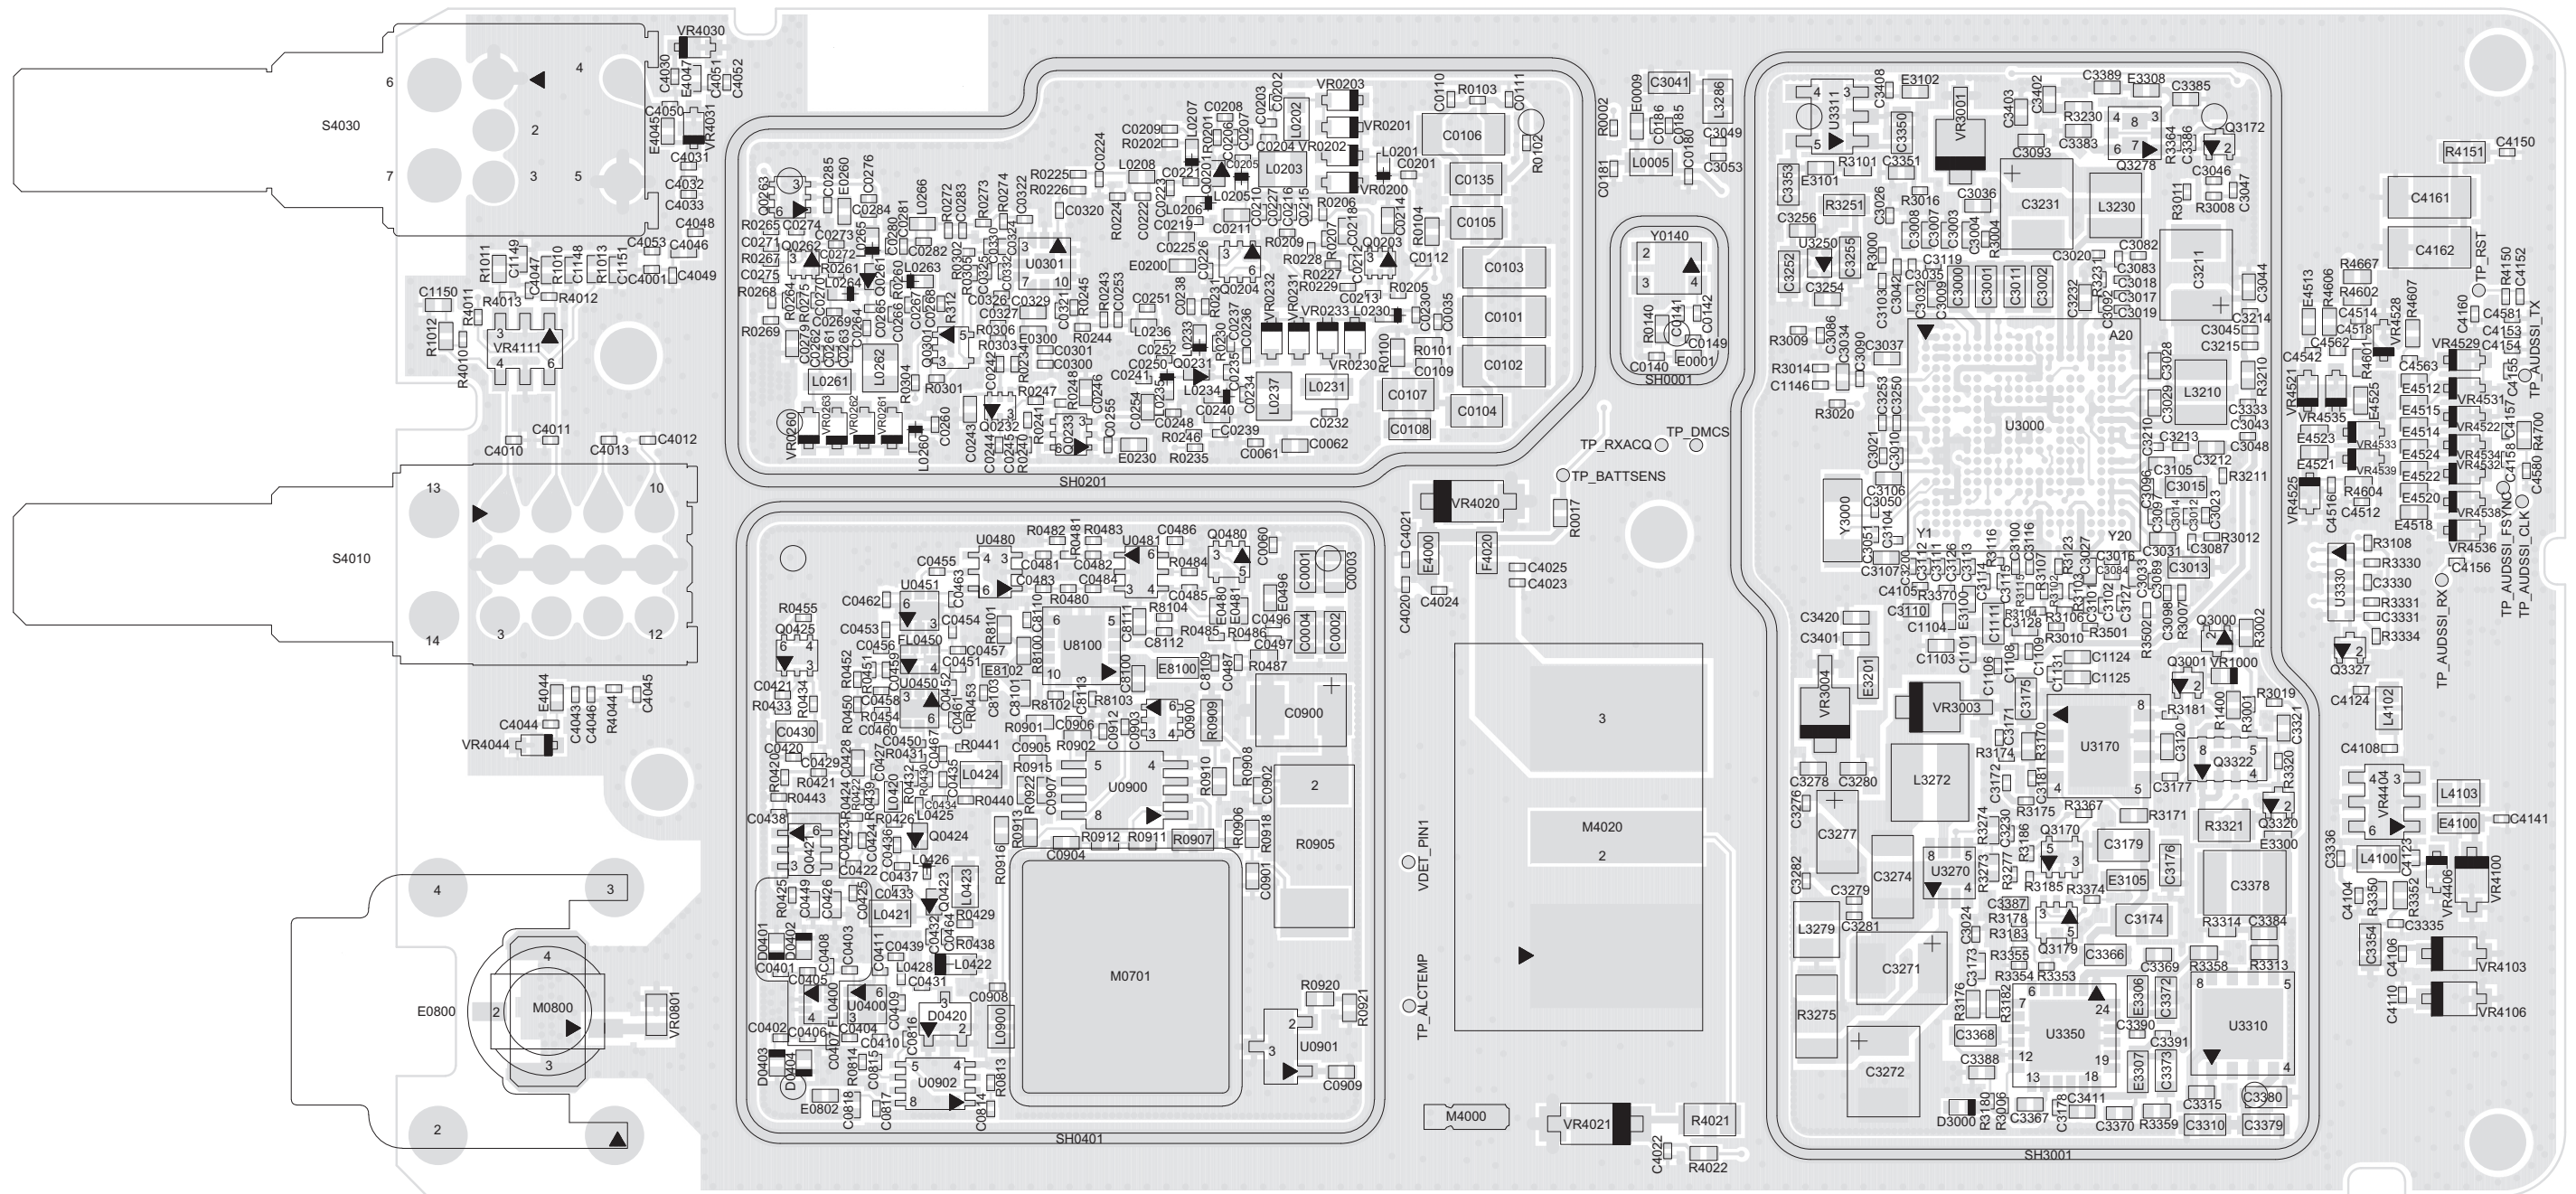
Main Board 800/900 MHz Bottom Side PCB No. PC000970A01\_AA
